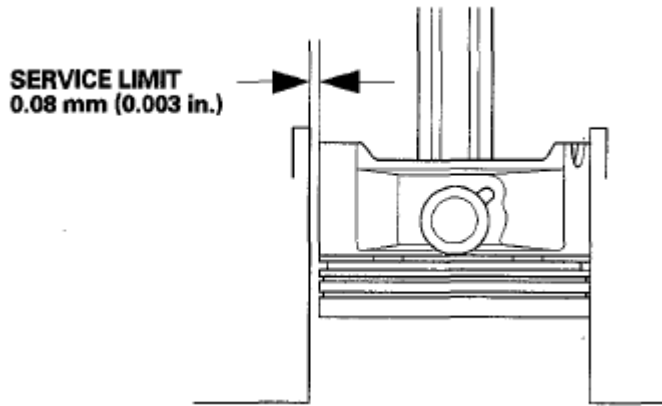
Identifying Clearance Between Cylinder Bore Diameter & Piston Diameter
